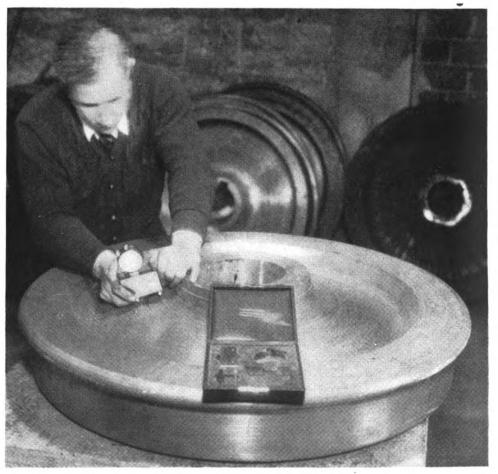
Method of using strain gage in measuring a rosette on a car wheel
